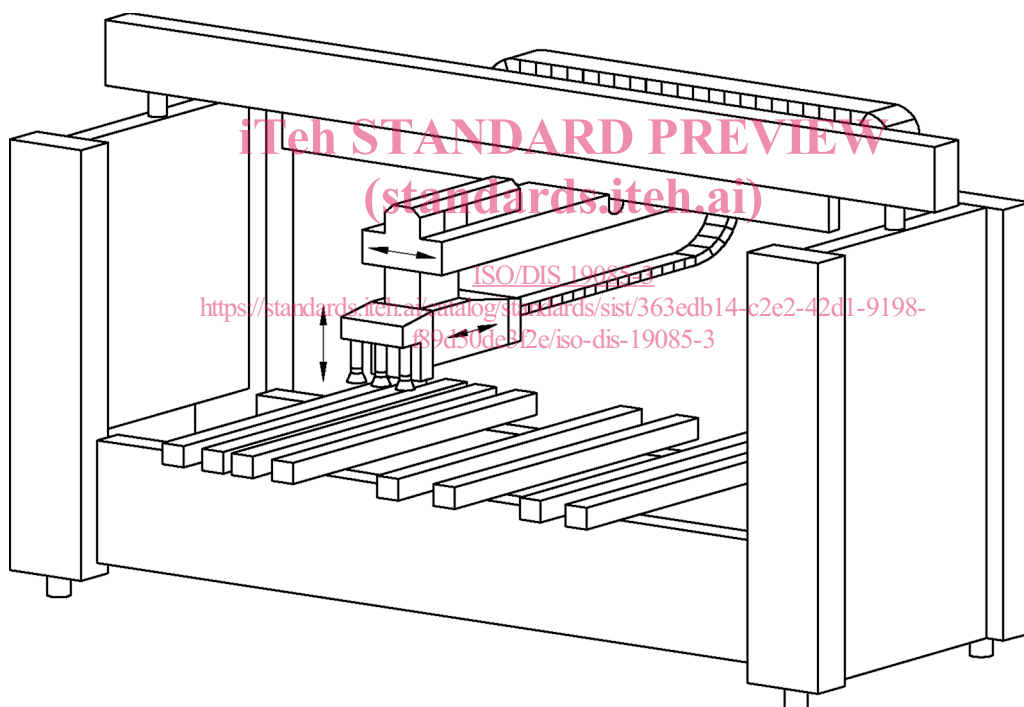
Example of portal frame machine with fixed portal, feeding belts, moving machining head
